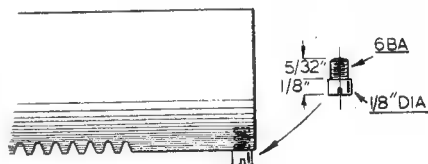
Showing the stop screw fitted to the lower end of the quill
